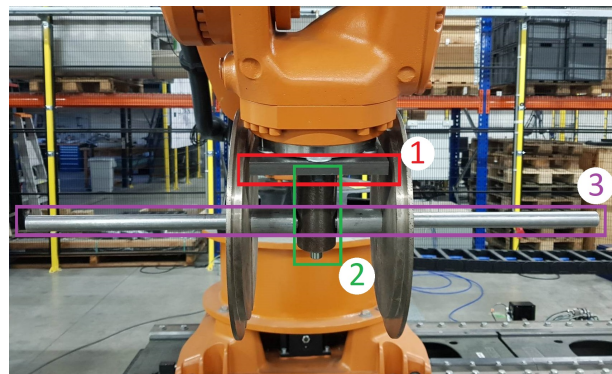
Barbell components. 1 - Plate, 2 - Cylinder, 3 - Bar
